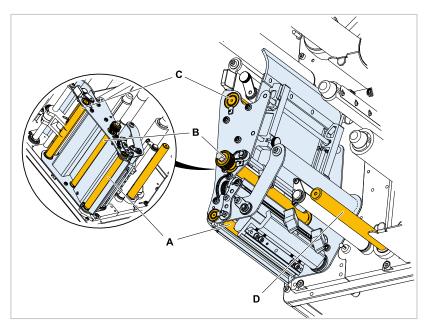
Positions of the rubber rollers (A = Print roller, B = Brake roller, C = Feed roller, D = Ribbon feed roller)
